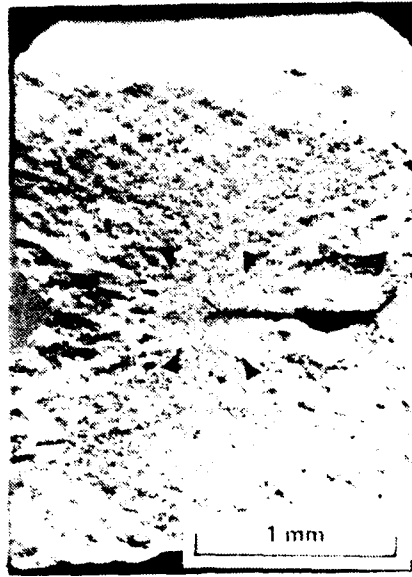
Optical photograph of an as-received fracture surface of NC-132 stress rupture specimen showing the fast fracture-type failure. Specimen failed after  $\approx 0.4$  hours under 500 MPa stress.
